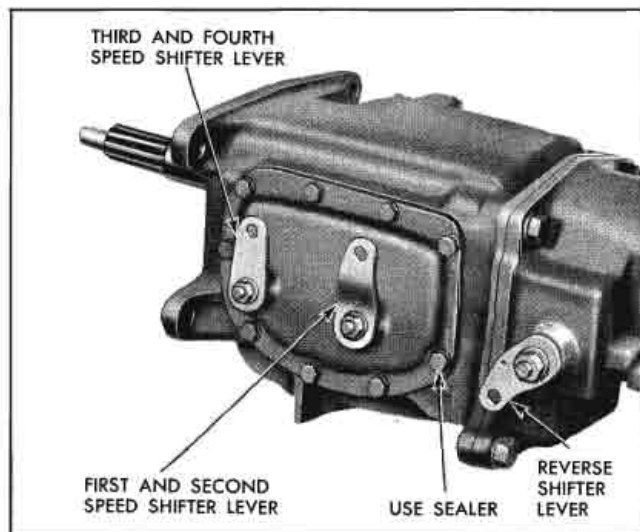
B-10 Sealing Side Cover Attaching Bolt
